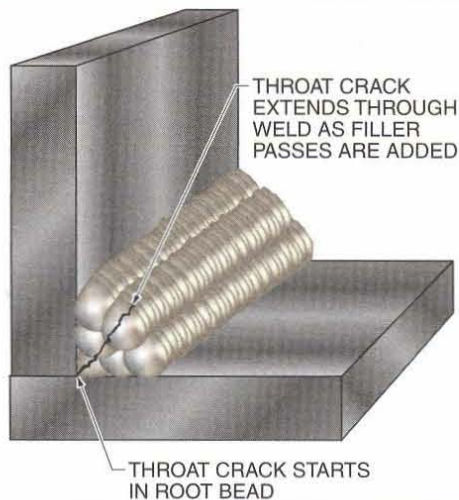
Throat cracks are longitudinal cracks that start in the root bead and extend through the weld as filler passes are added.
